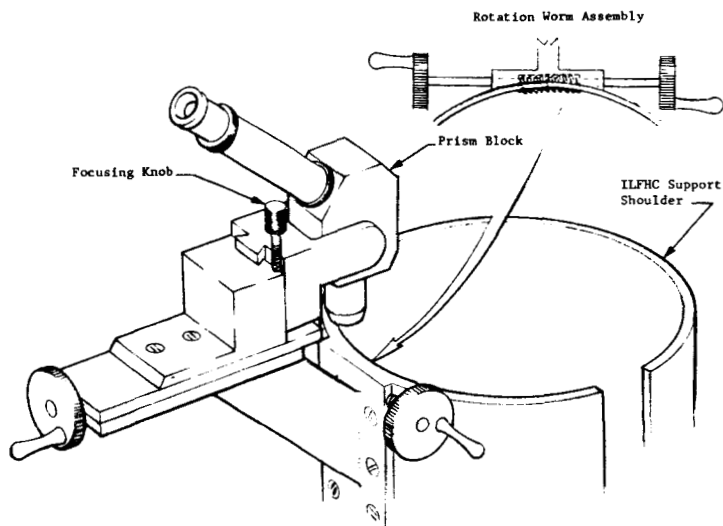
Pictorial view of microscope fixture for high-pressure ILFHC
